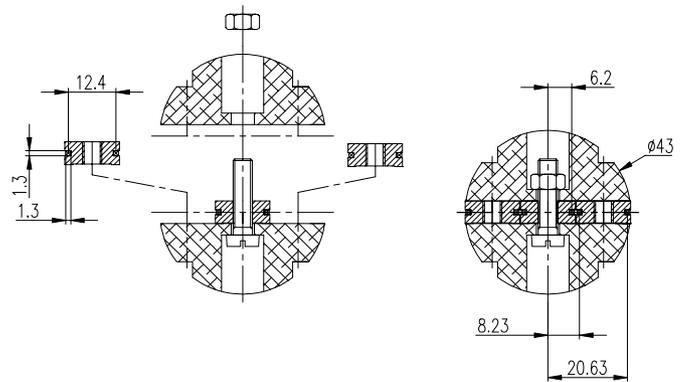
Assembly of a five coil system for measuring quadrupole, sextupole and other multipolar magnets. This figure shows the smallest diameter realised for such an assembly. Ceramic pins of 4mm (or even 3mm) are used for positioning the coil during its fabrication and mounting at during assembly
